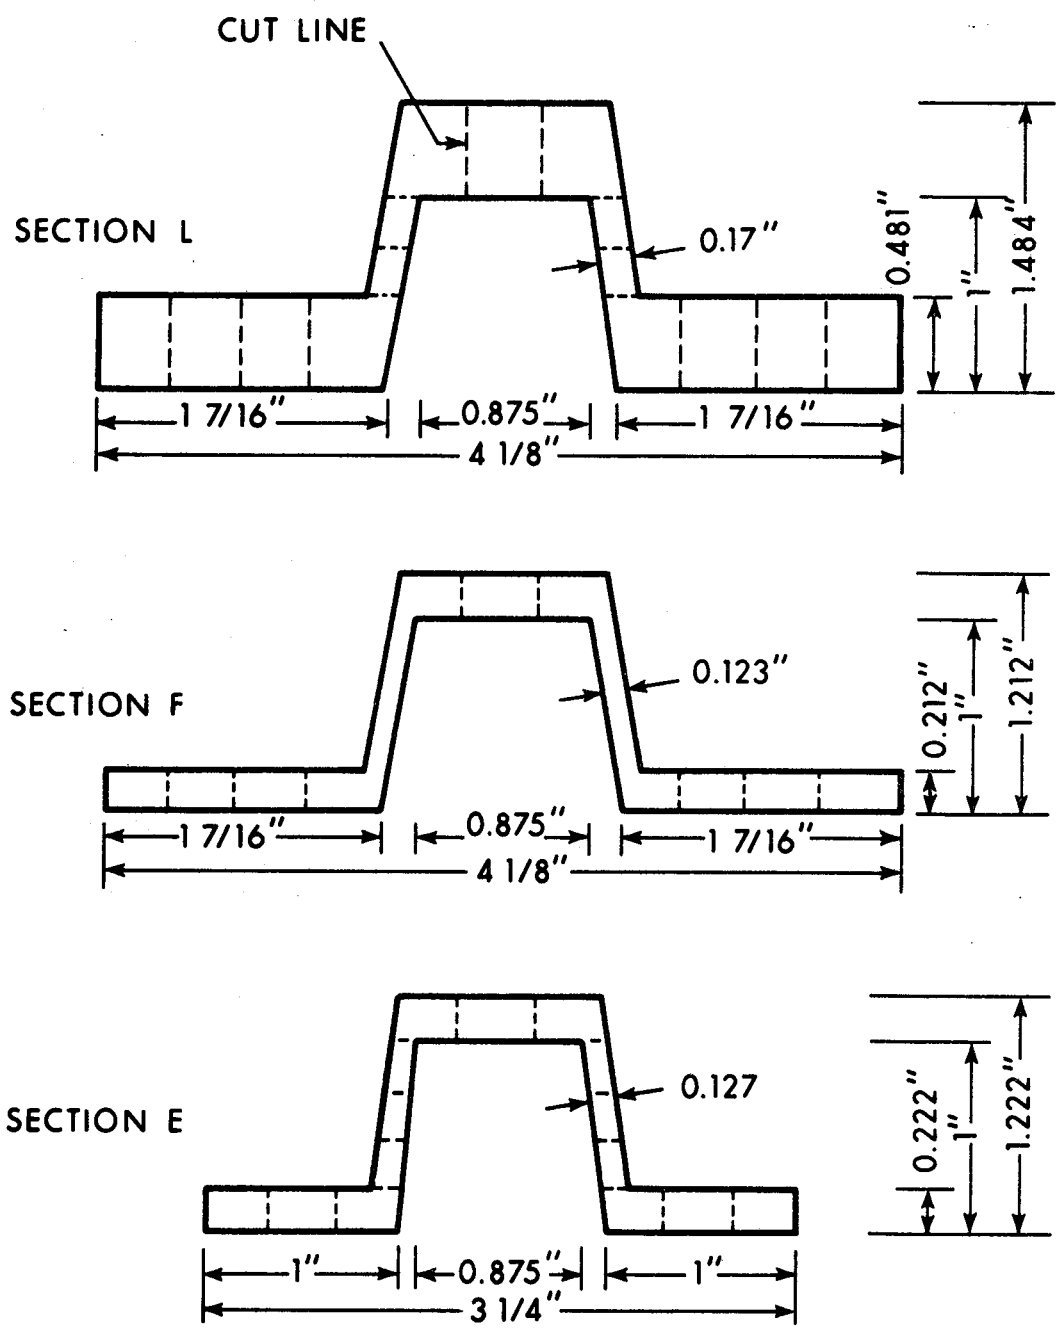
SECTIONS E, F AND L - DIMENSIONS TAKEN FROM MANUFACTURERS CATALOGUE
